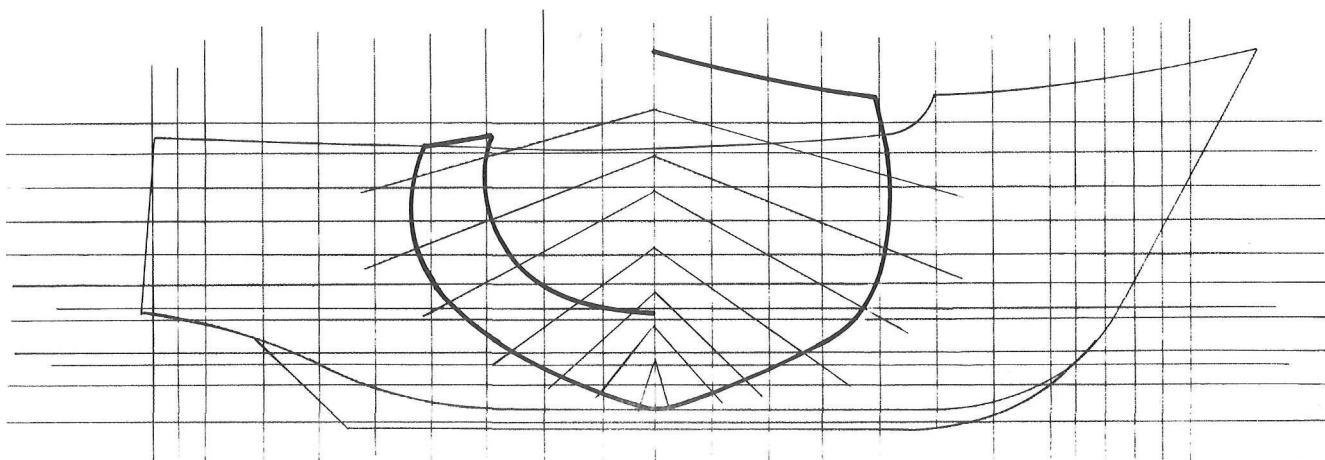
HULL SECTIONS. Drawn to full-size on the lofting floor.
